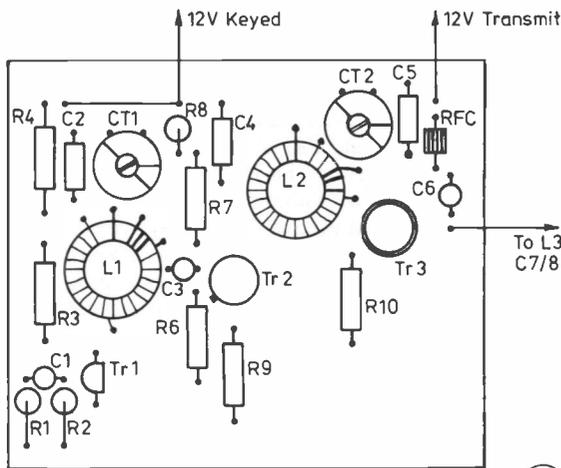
TRANSMIT BOARD LAYOUT (actual size).
